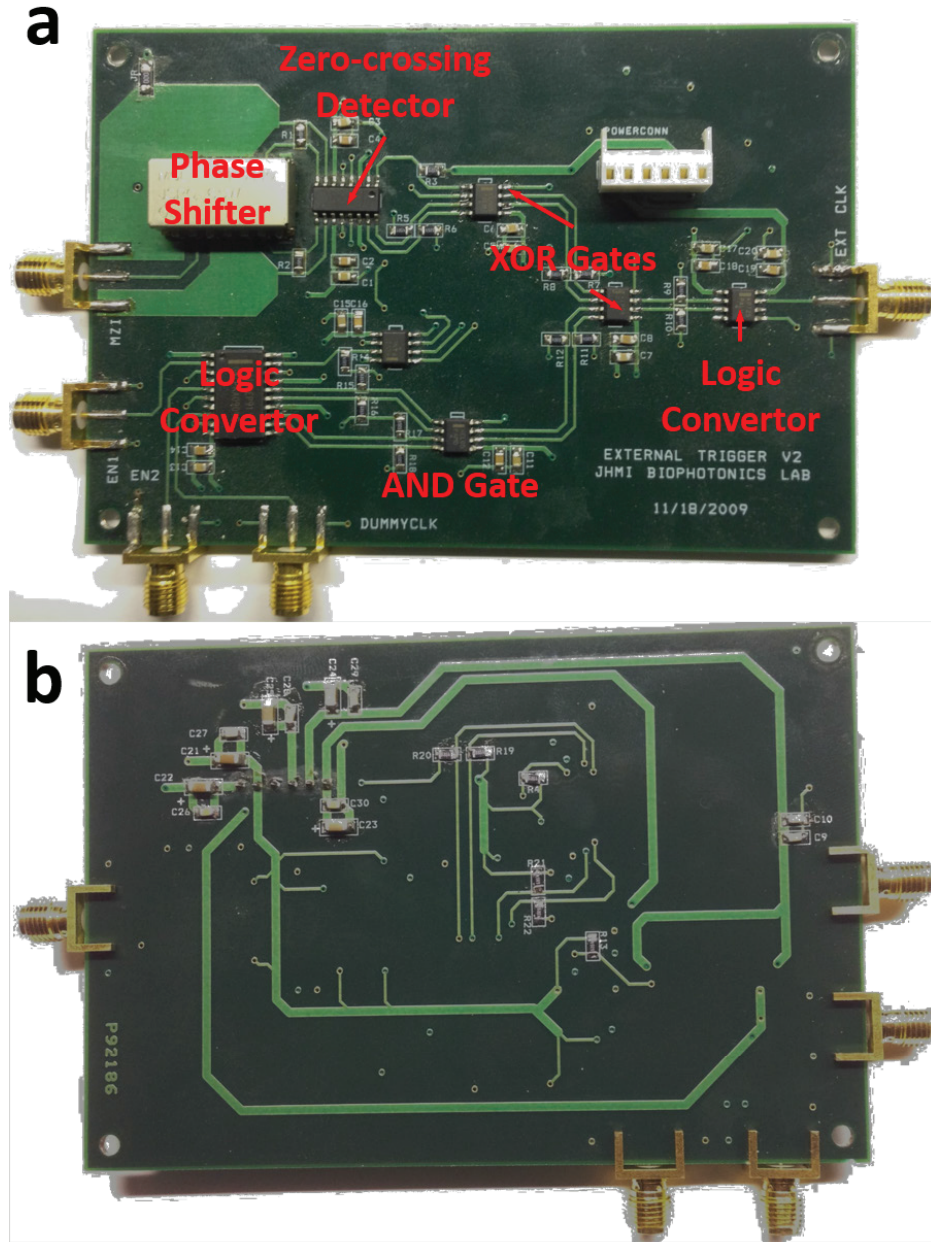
Photos of PCB board of the K-clock generator; (a) front side and (b) back side.
